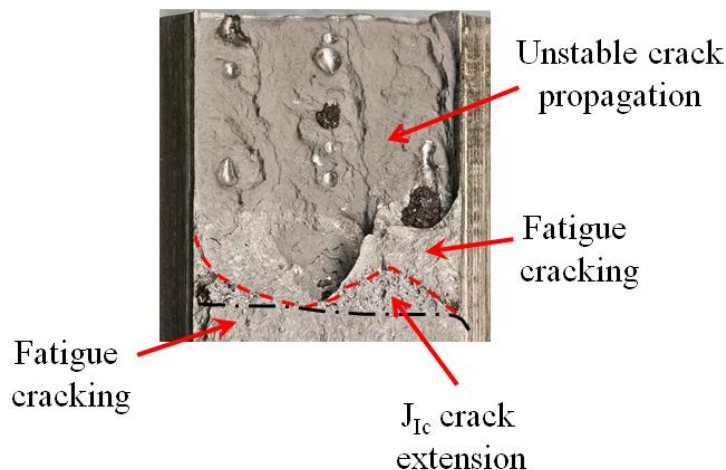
Fracture toughness J_{Ic} test fracture surface of the third test performed in the HAZ in as-welded condition (HAZ-AW-3 sample)
